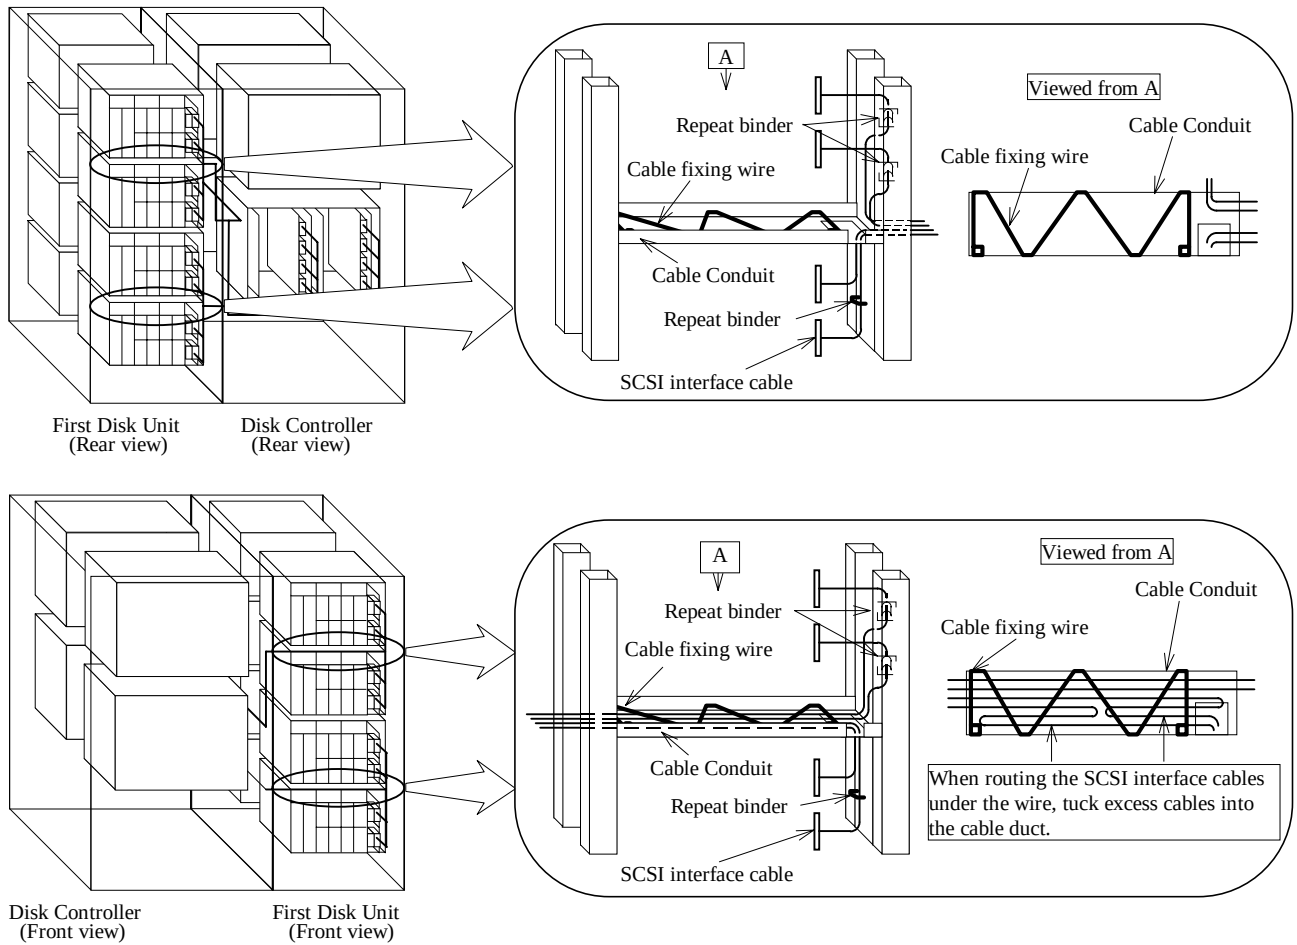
Fixing of SCSI Interface Cables
